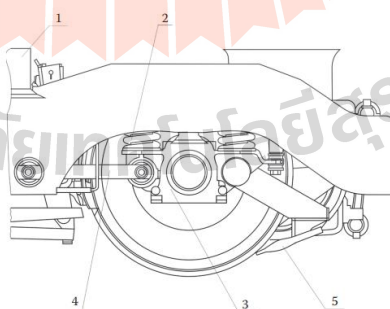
Primary suspension design of heavy haul locomotive (EMD GM, USA). 1—Side bearing; 2—primary suspension coil spring; 3—axle box; 4—traction rod; 5—sand nozzle.
